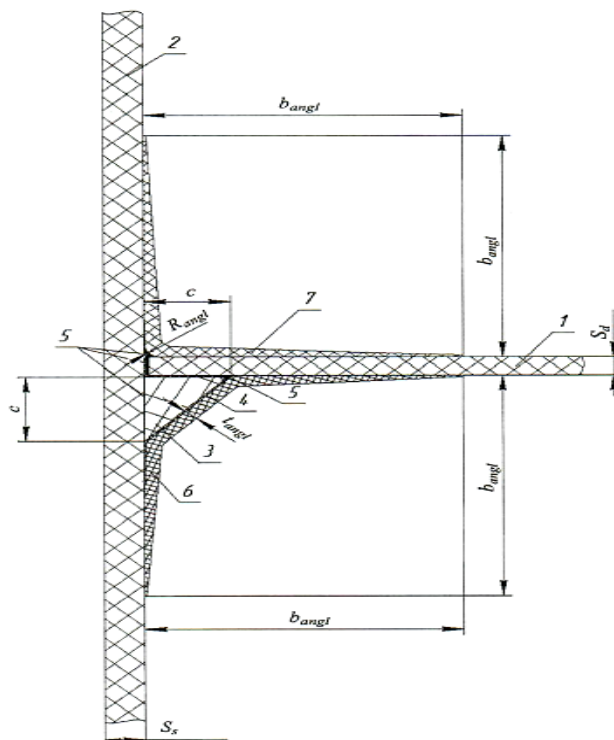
Joint of the inner deck (platform) with a single-skin side plating:
